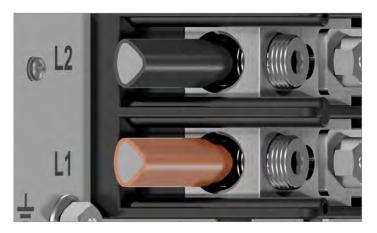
Correct position of sector-shaped aluminum cables (2)
